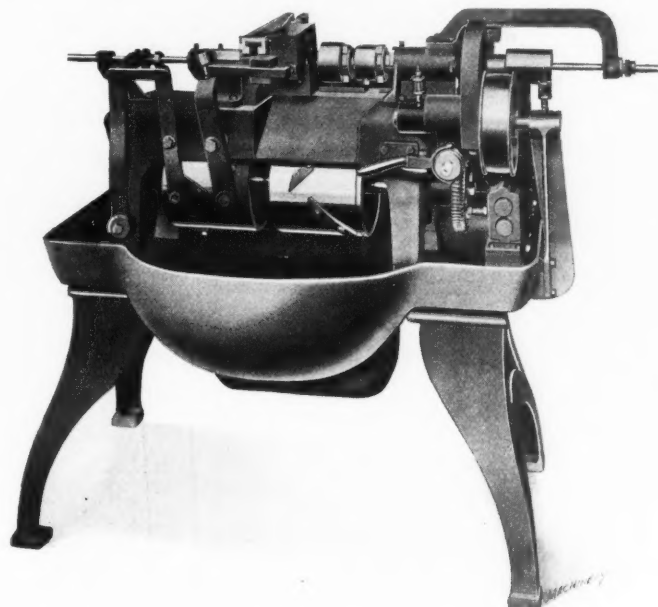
National-Acme Size No. 1, Style TM Stud Threading Machine
